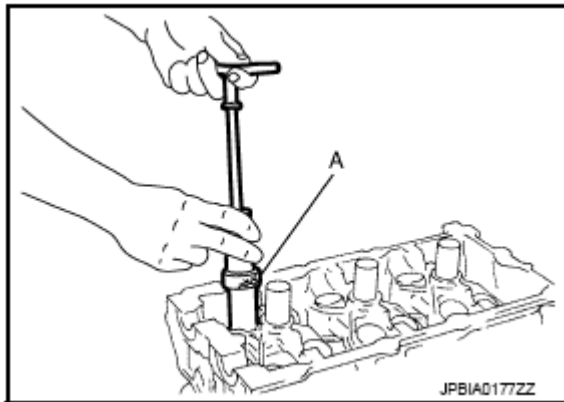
Removing Valve Oil Seal Using Valve Oil Seal Puller
